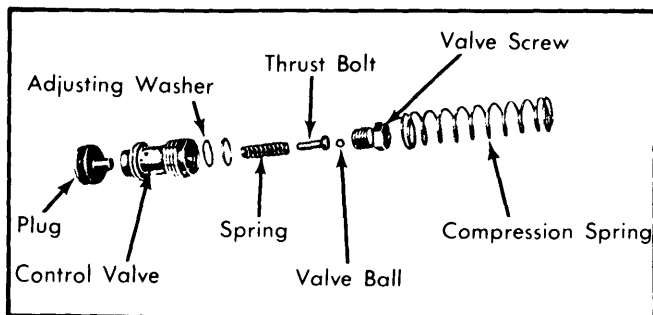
Exploded View of Control Valve Components (VT27 Shown)
